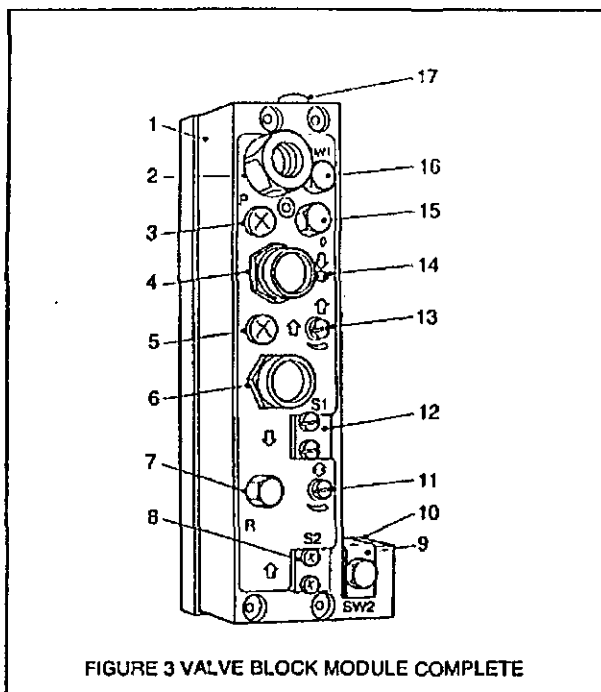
VALVE BLOCK MODULE COMPLETE
